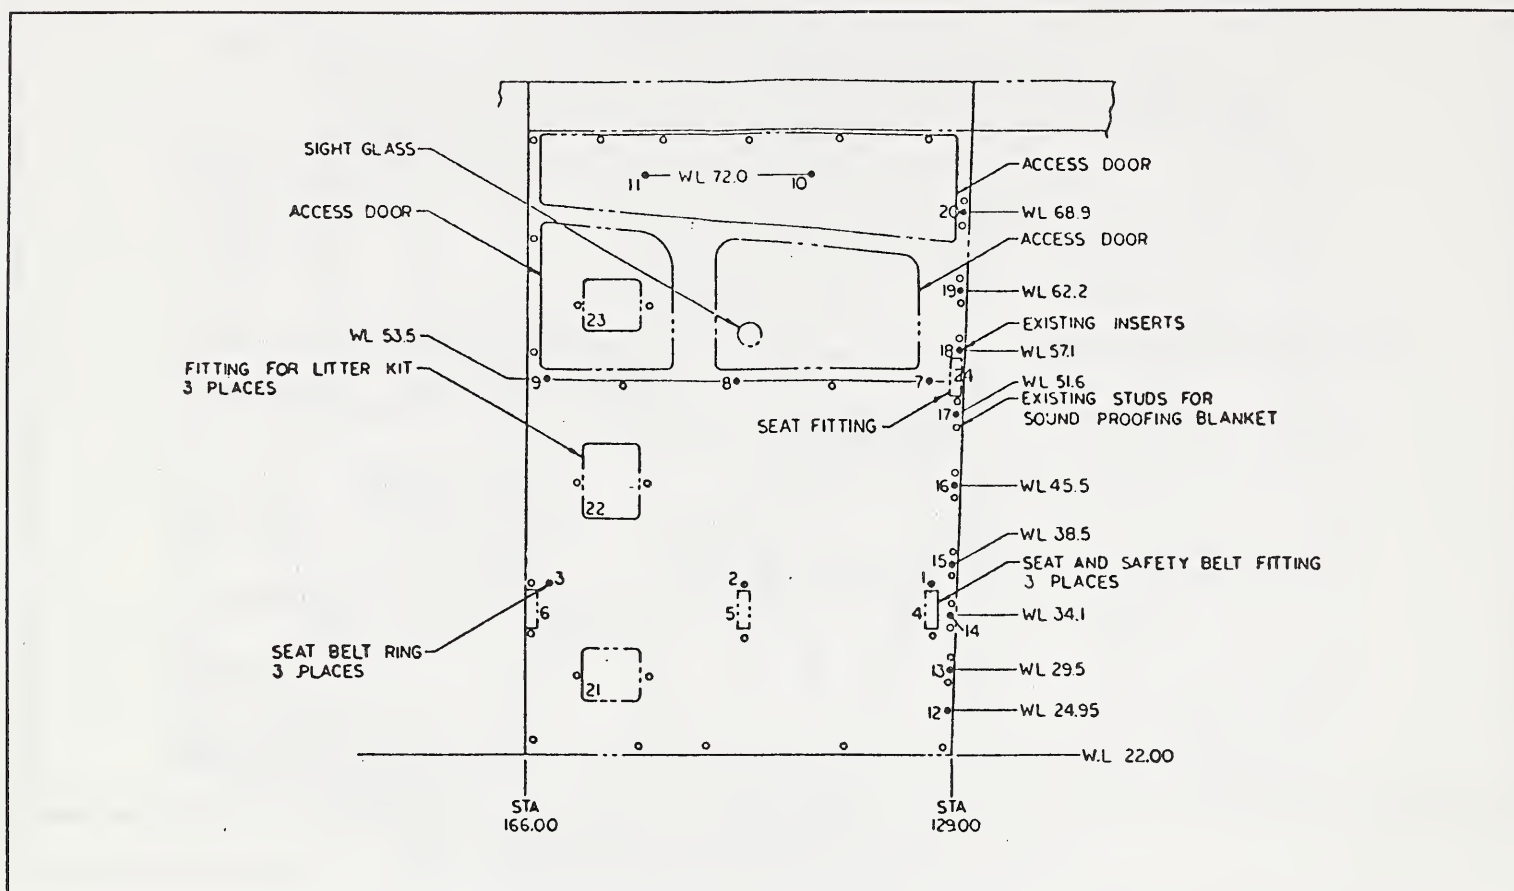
Bell 205A B.L.14 righthand wall fittings.
